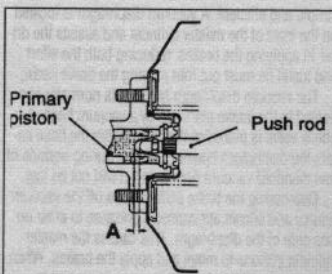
The brake booster pushrod and primary piston clearance (A) must be adjusted
